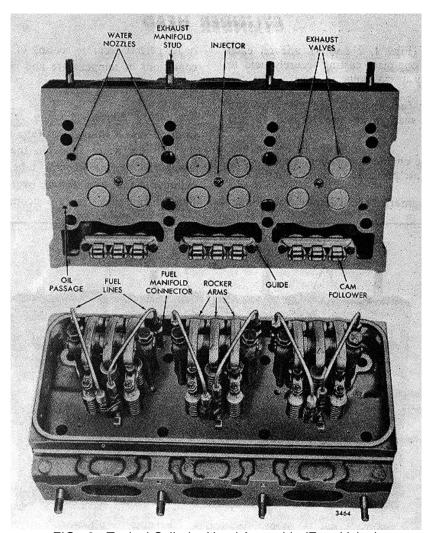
Typical Cylinder Head Assembly (Four-Valve)
